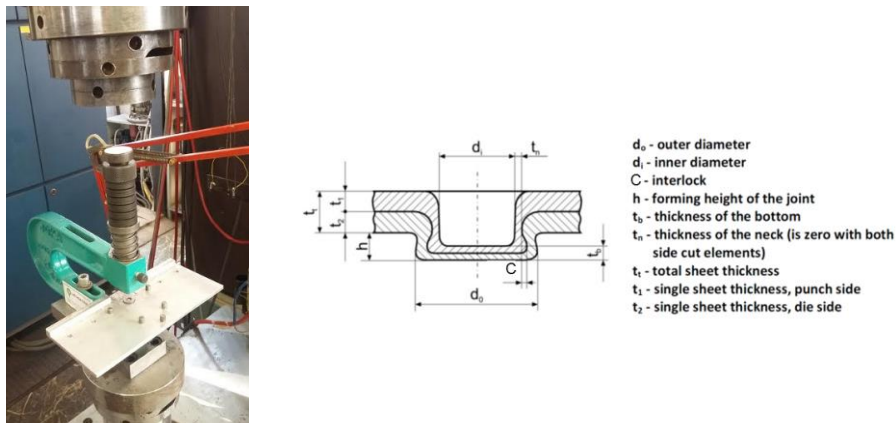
Clinching tool (TOX) and the relevant geometrical parameters of the joint [8]
